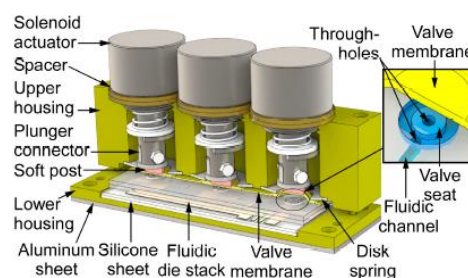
The solenoid actuated microvalve module which transmit the displacement from solenoid actuators to valve membranes. The valve membrane will then be pushed on the valve seat and seal the through holes<sup>17</sup>.
